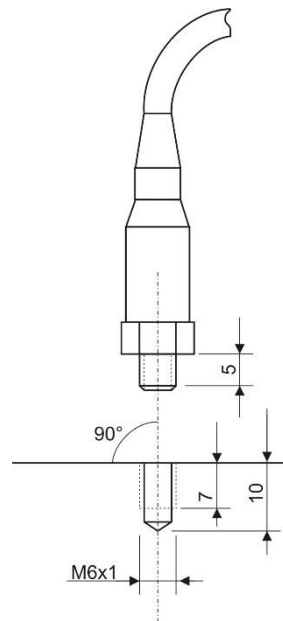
Vibration acceleration sensor with angled connection cable and mounting bolt
